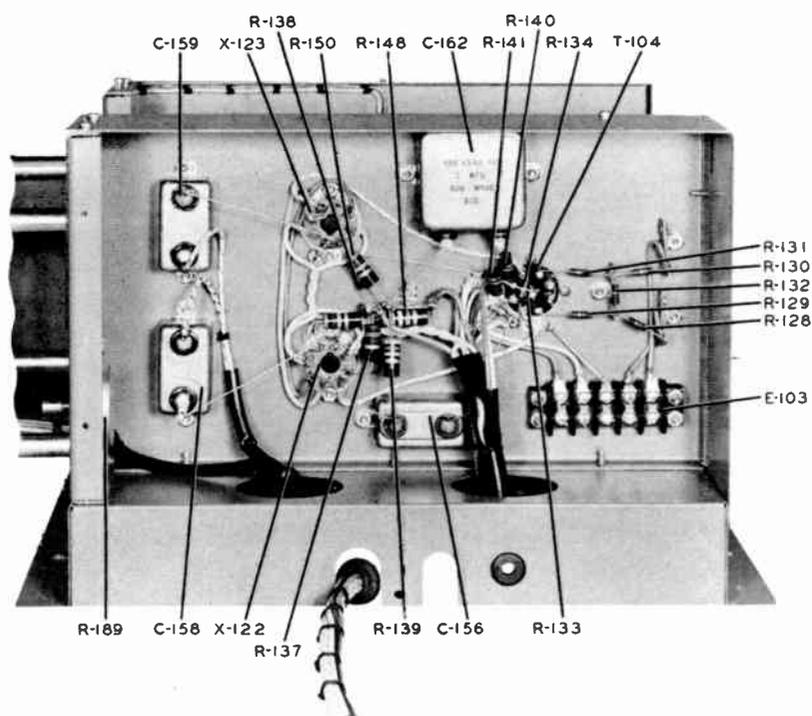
Driver Cabinet Audio Chassis, Bottom View.
